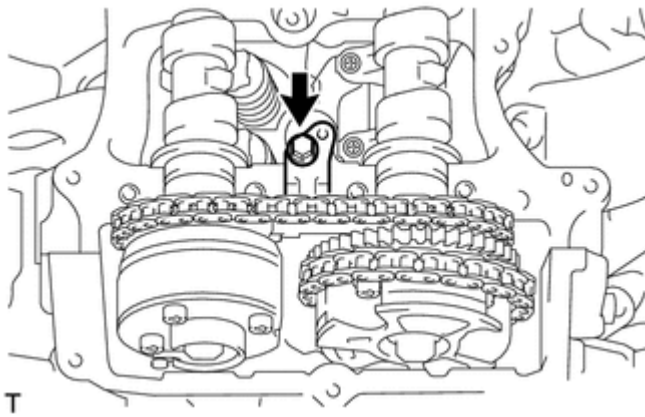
Identifying No. 2 Chain Tensioner Assembly & Fastener
